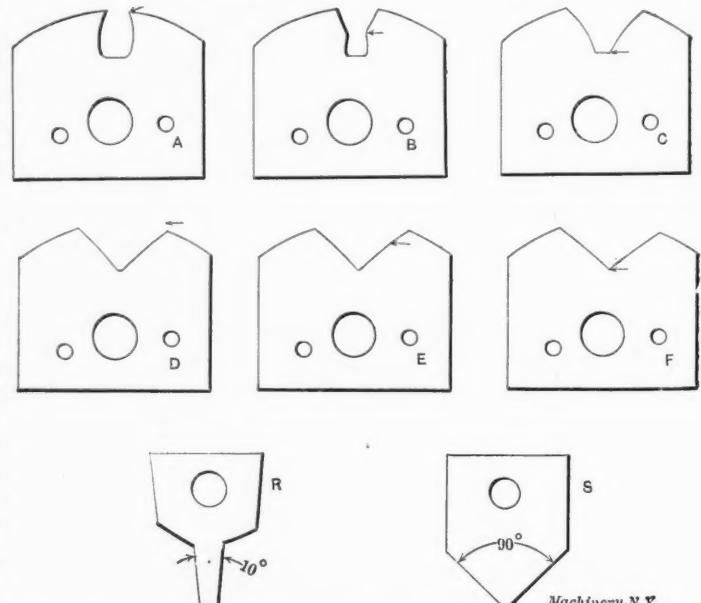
Pieces milled on the Chuck, Fig. 1, with Fly-cutters R and S, showing the Effect of varying the Table Angle.
